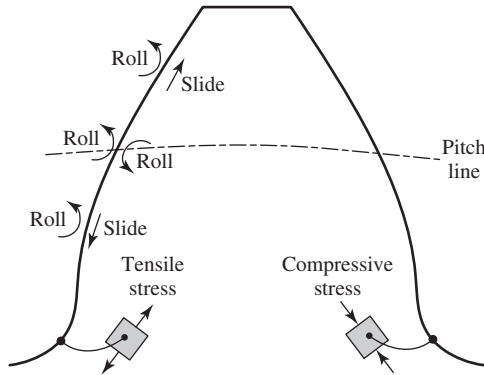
The stresses developed in a spur gear tooth due to rolling contact. (After Alban, 11.)
